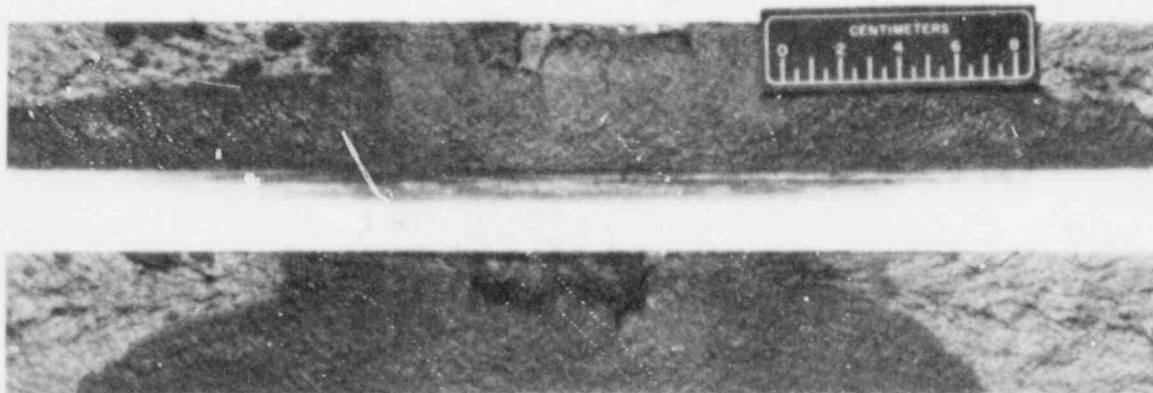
Fracture surfaces of two broken halves of plate CP-21. Plate ruptured ~ 2.5 h after start of hydrogen charging.
